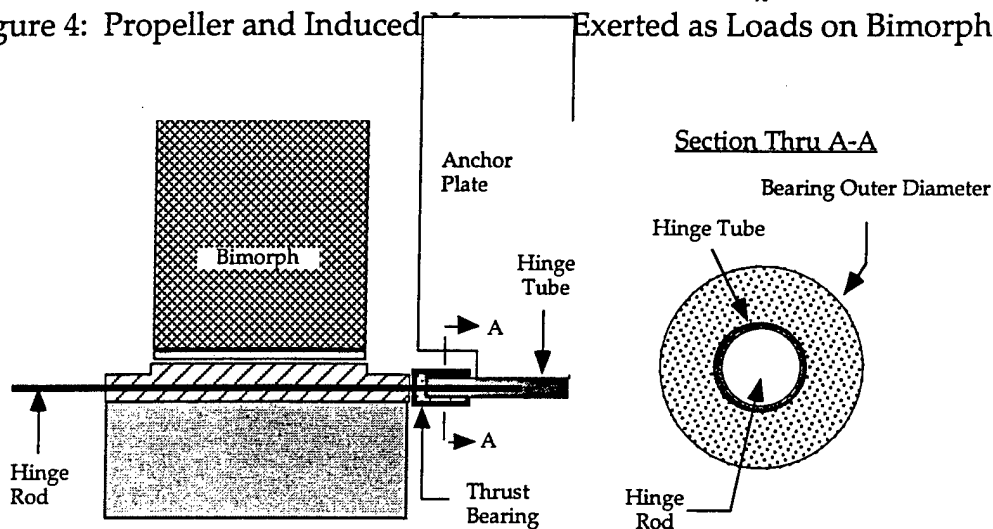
Bimorph-Flap Assembly with Thrust Bearing
